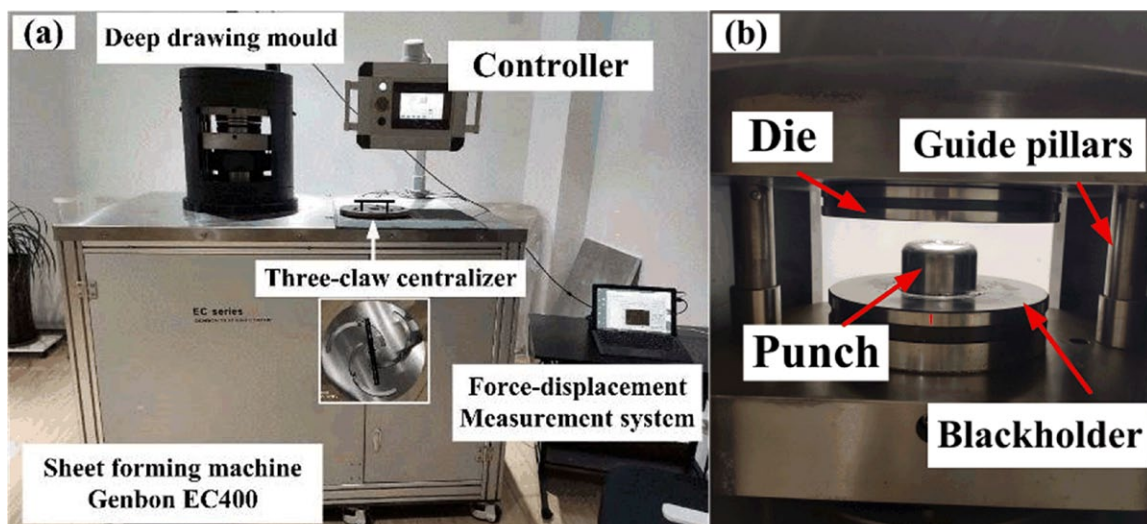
(a) Deep drawing equipment and (b) forming mould
